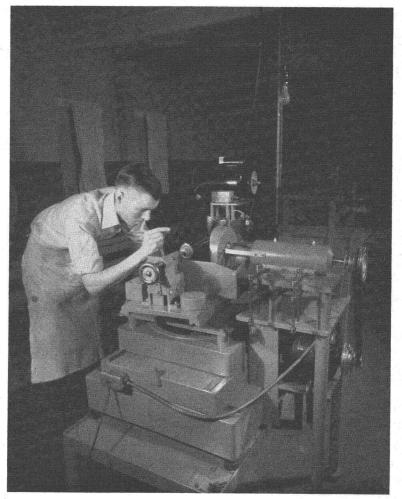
Machine built by J. W. Fecker, Inc. for grinding and polishing prolate ellipsoidal glass blank.
